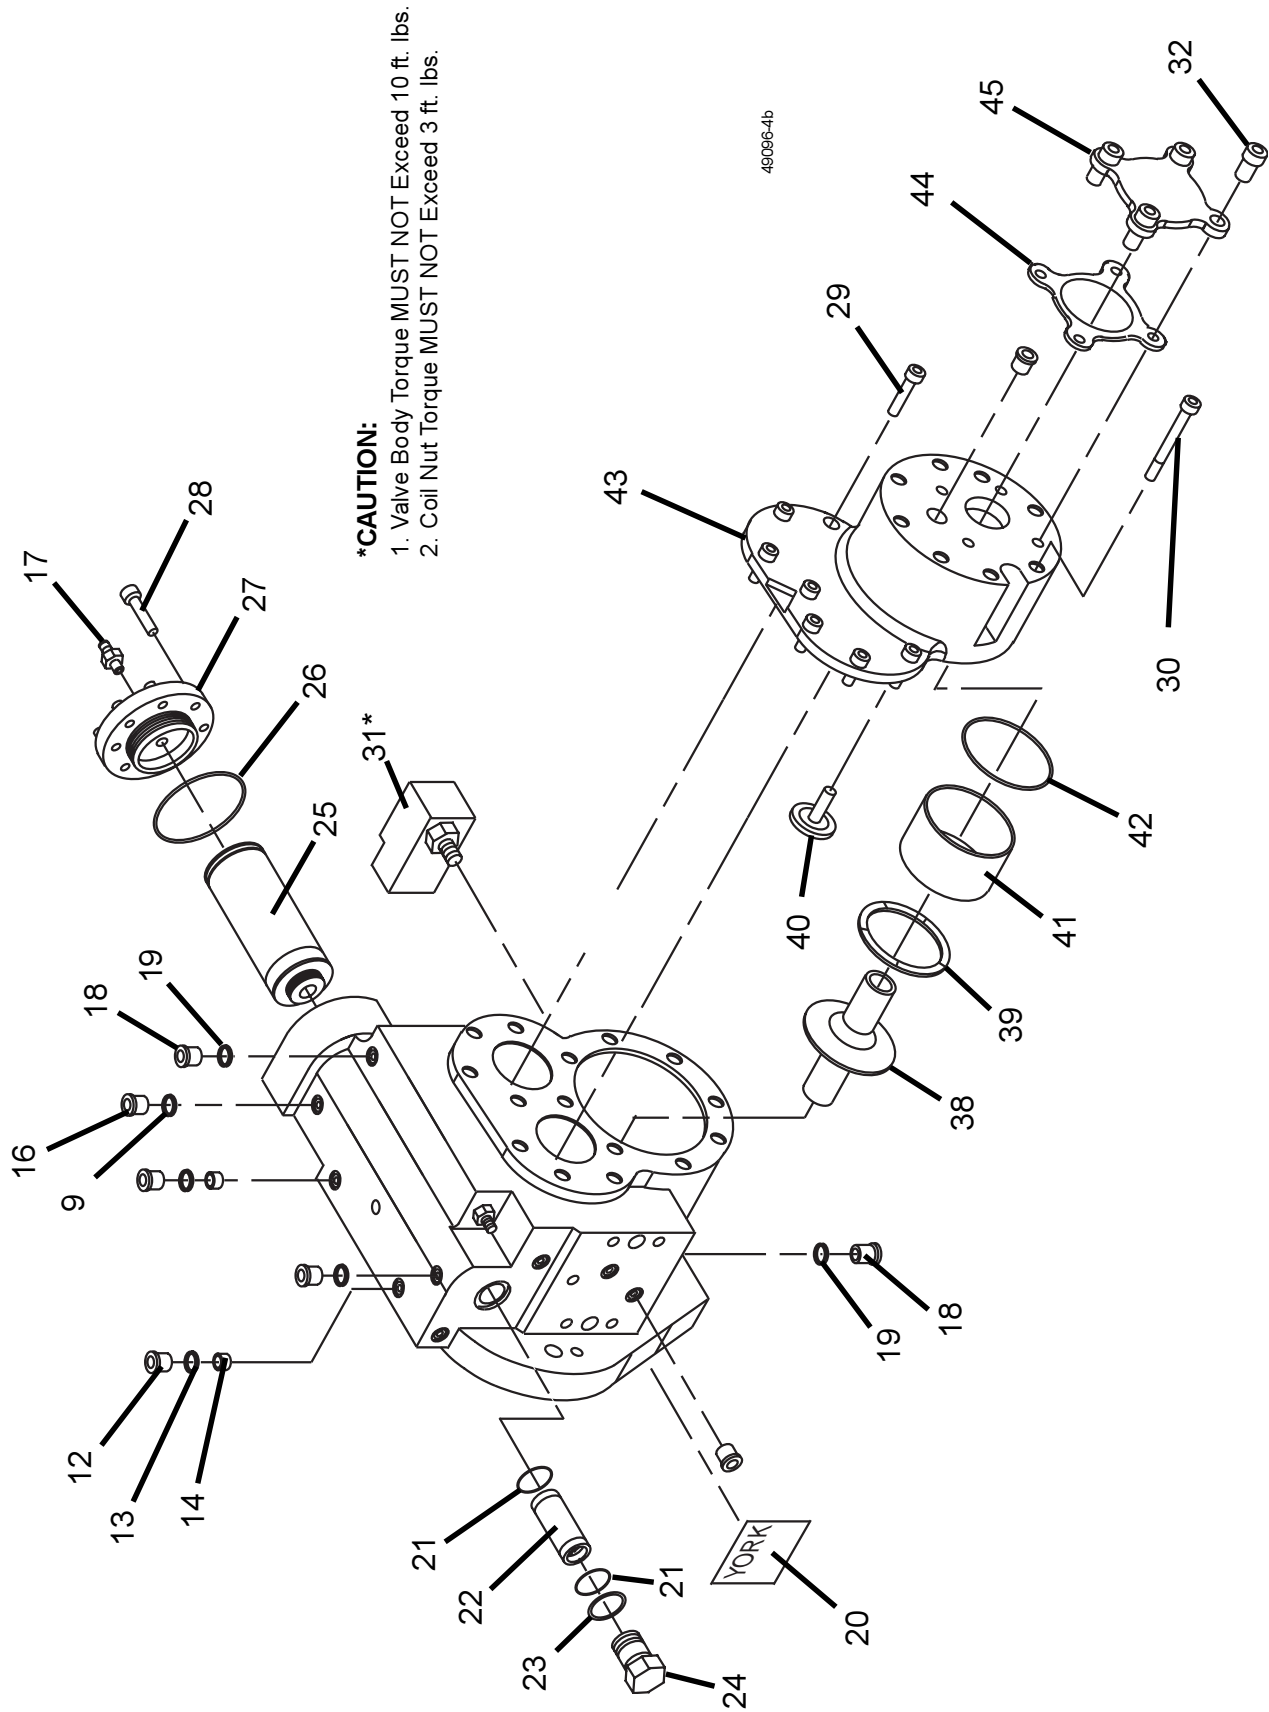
COMPRESSOR COMPONENTS - 112MM COMPRESSOR (REF. TABLE 5, PAGES 21 AND 22)
